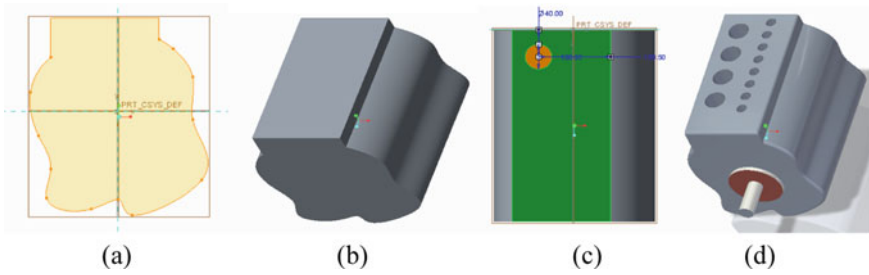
a 2D drawing of complex-shaped engine block cross-section, b solid part modelling of rigid engine block, c creation of piston boreholes, d solid modelling of the engine block with piston bores
